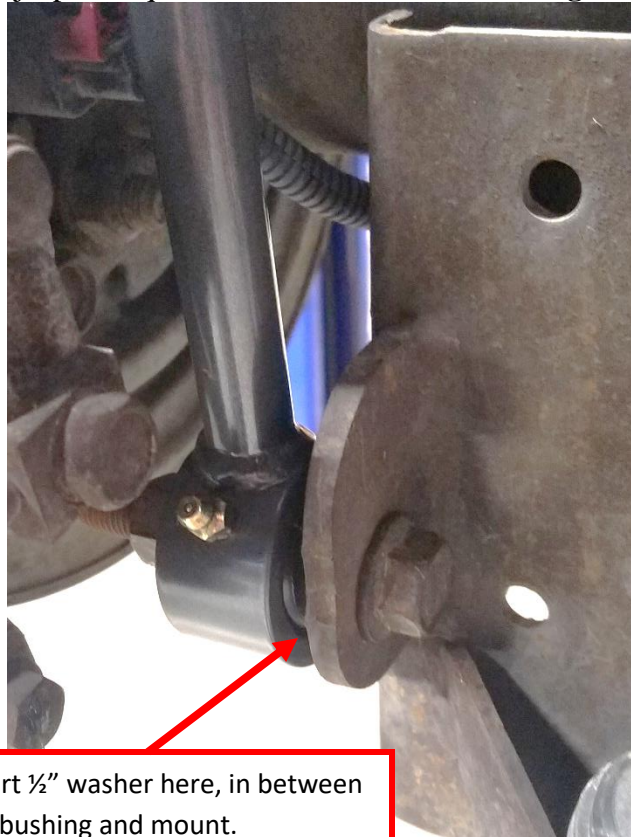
Correctly Installed Axle Side Sway Bar End Link
